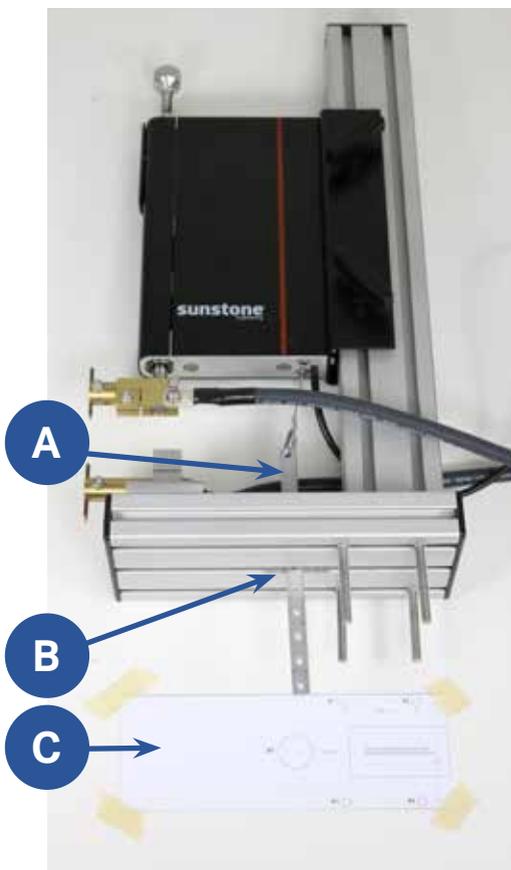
When used manually, the weld head must be bolted to a work surface. Use the mounting template found on page 29.
